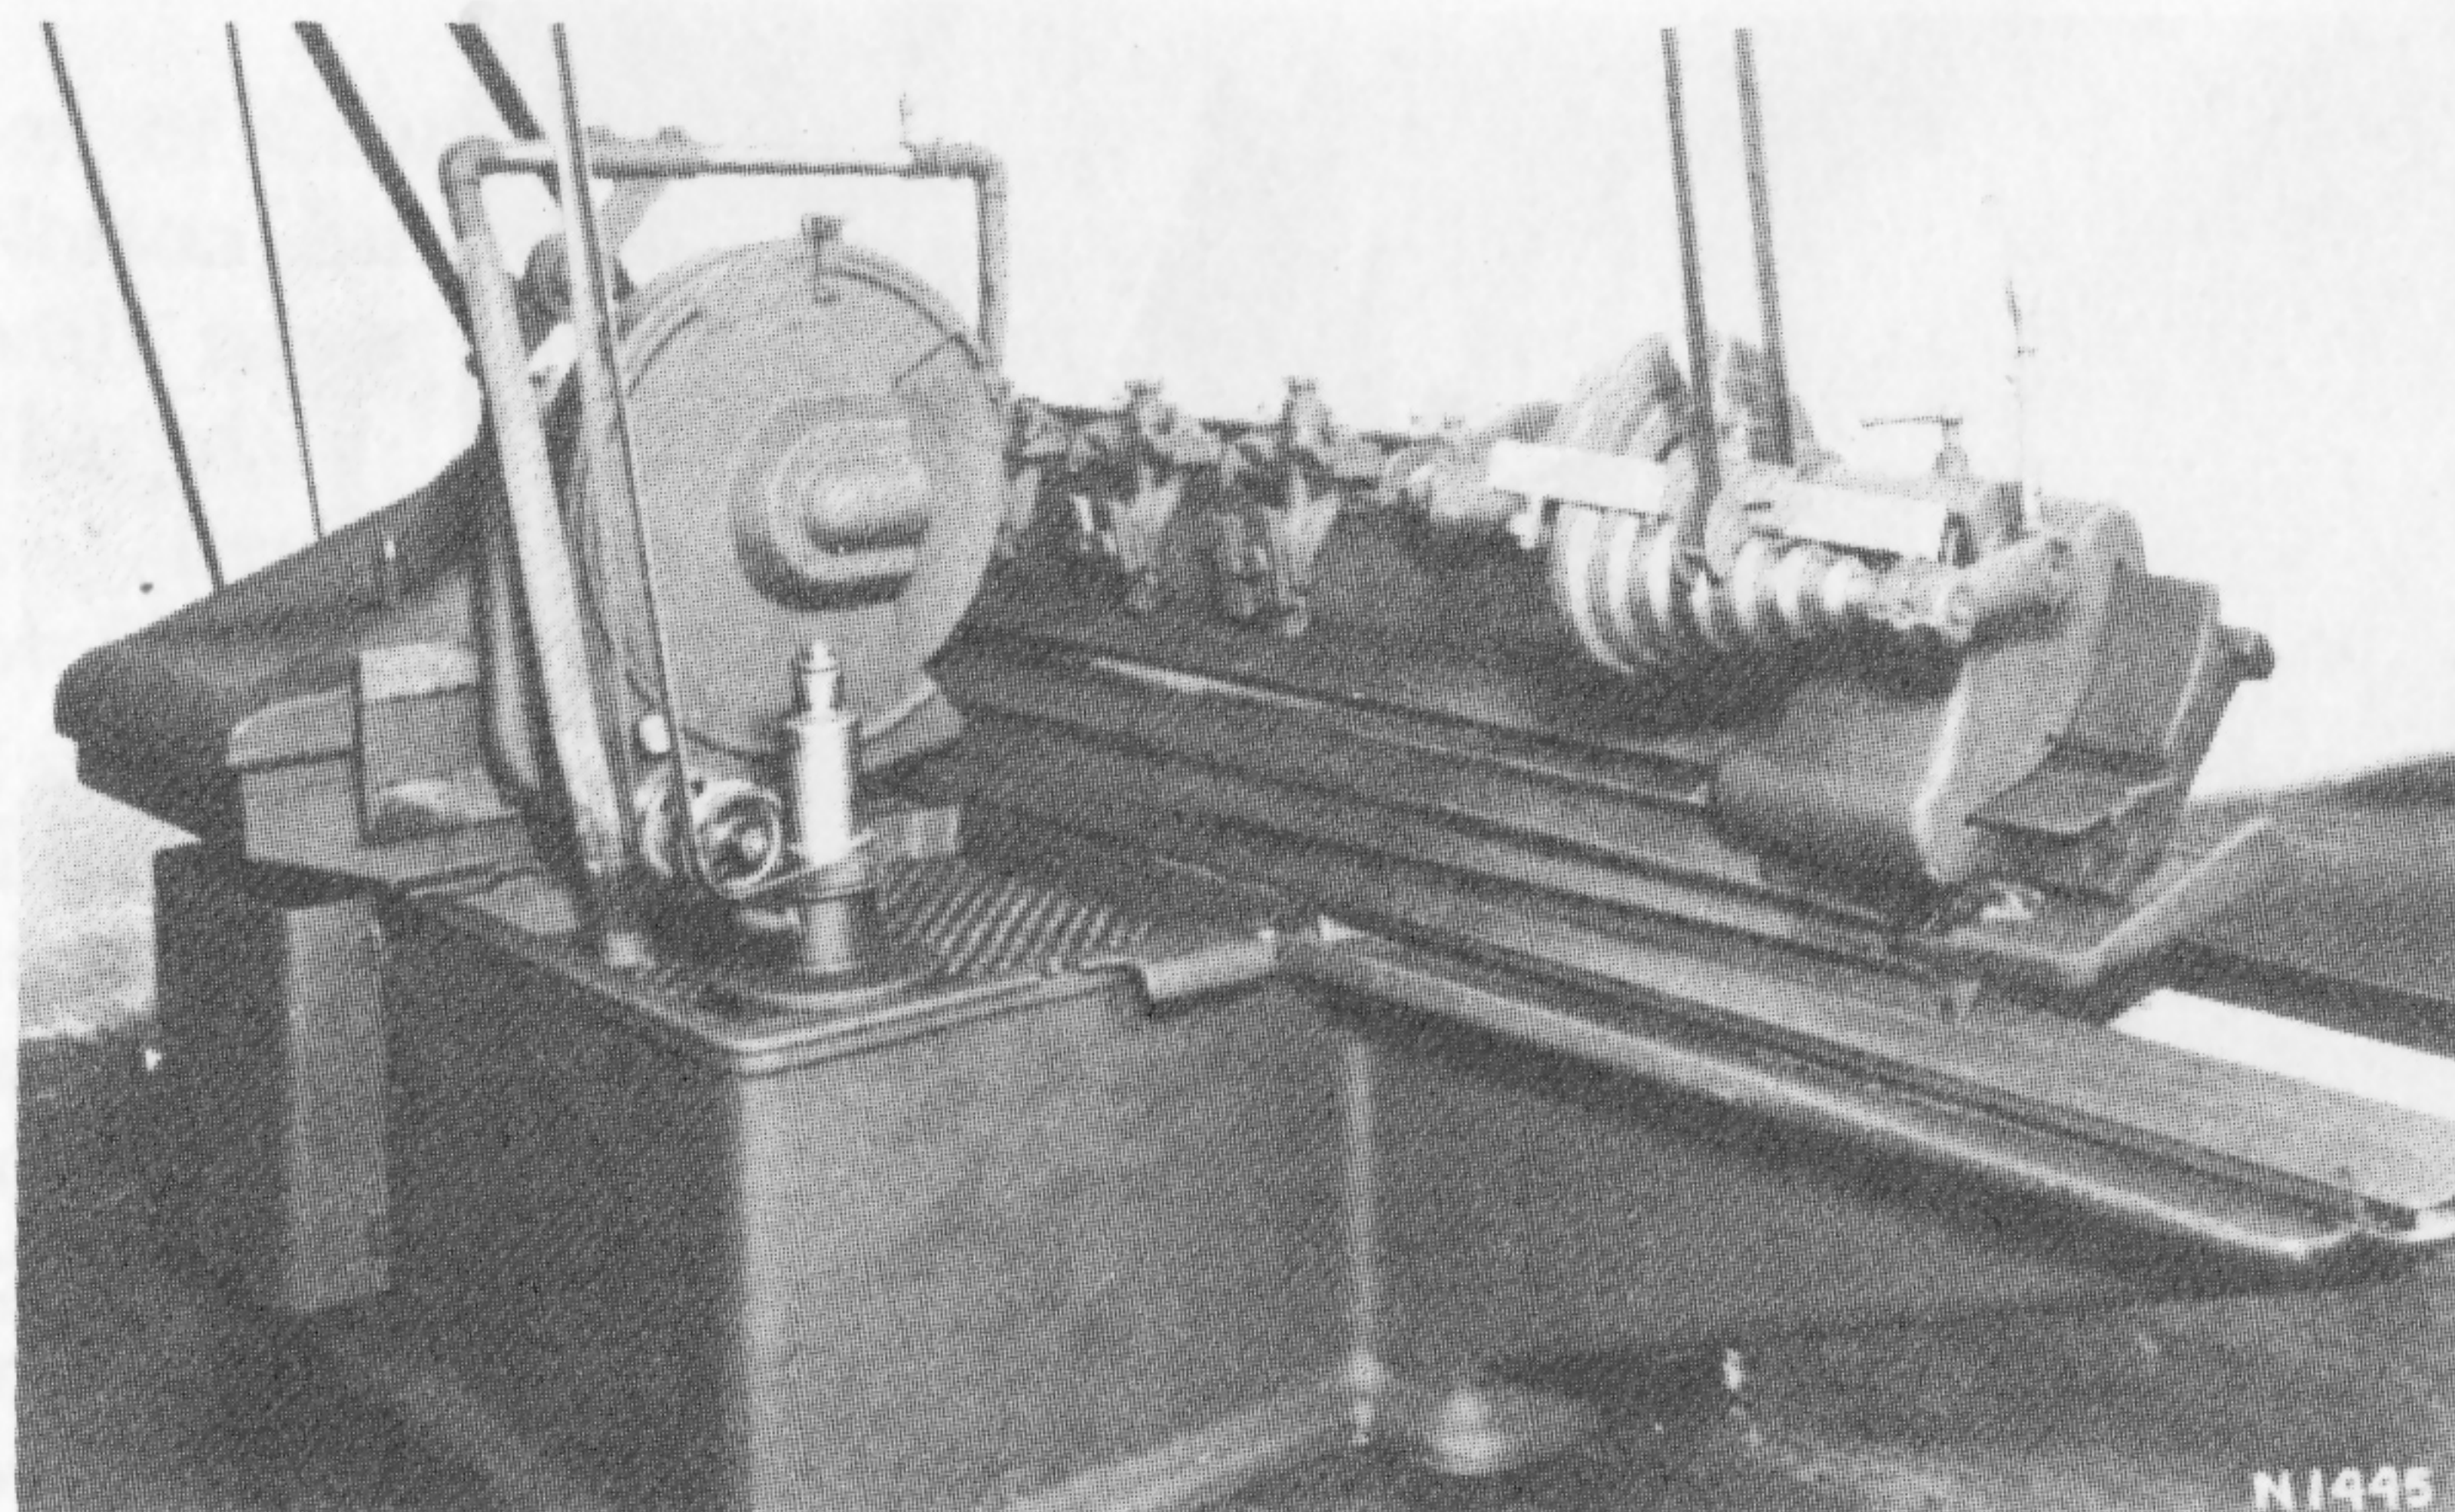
B NORTON'S ORIGINAL HEAVY PRODUCTION GRINDING MACHINE, 1900 (Rear) (Norton Company)
